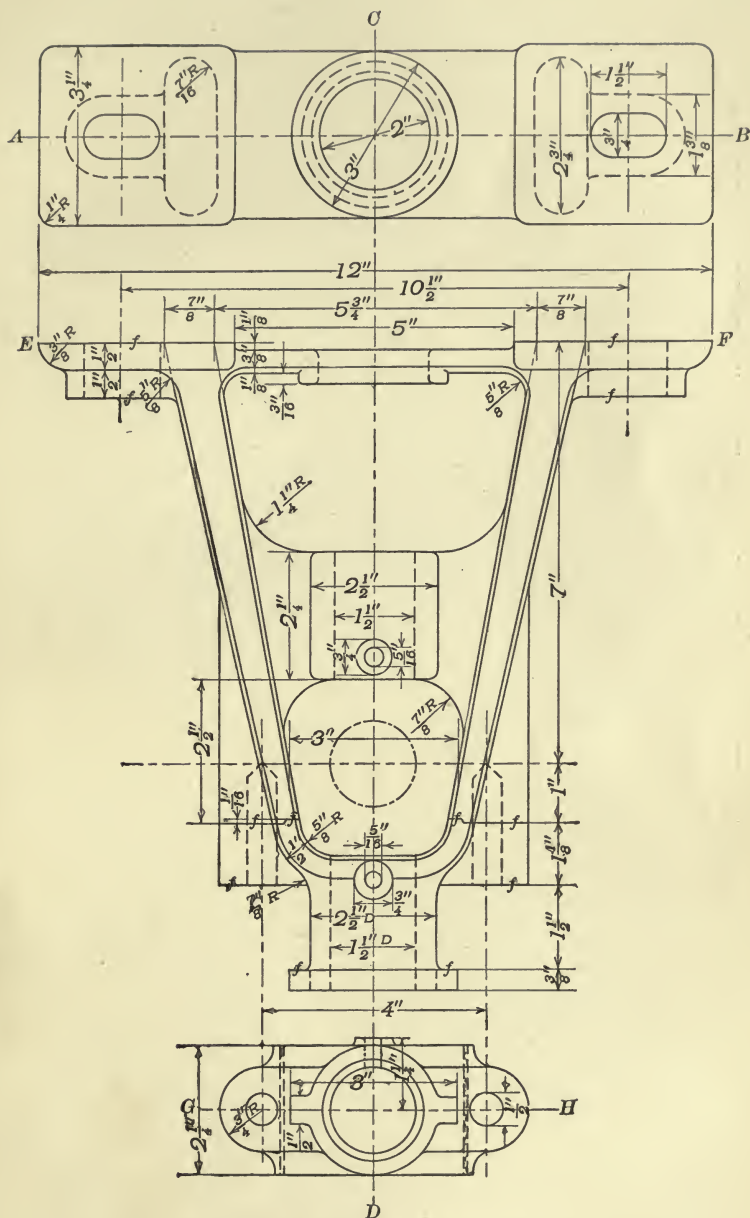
Mechanical Drawing of Shaft-hanger.
